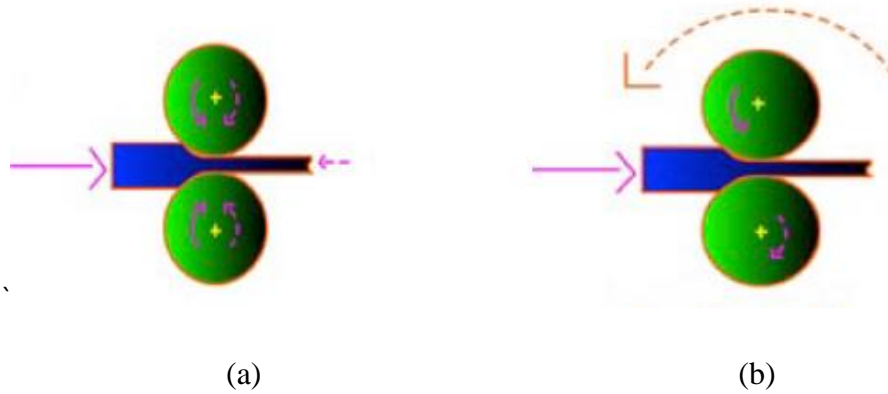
Two-High rolling (a) Reversing (b) Non-Reversing mill [1].
